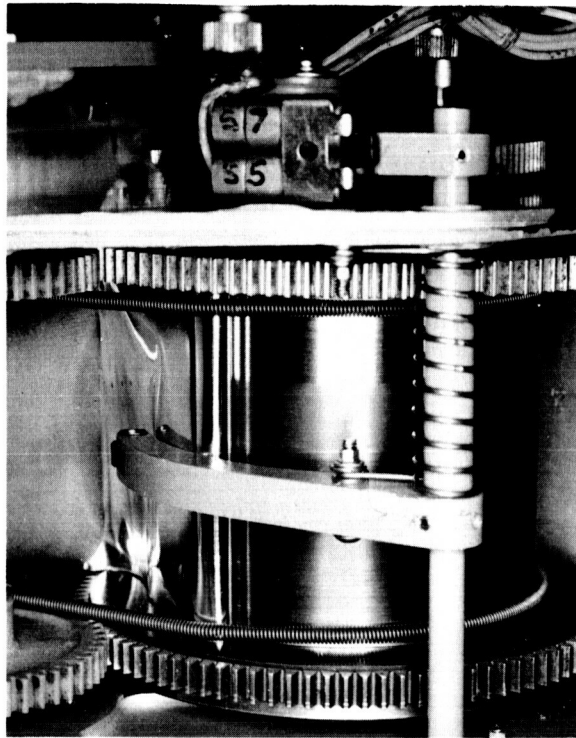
Erection Unit 1 Boom Element Failure When Manually Deployed, T-1a Primary Boom Package
